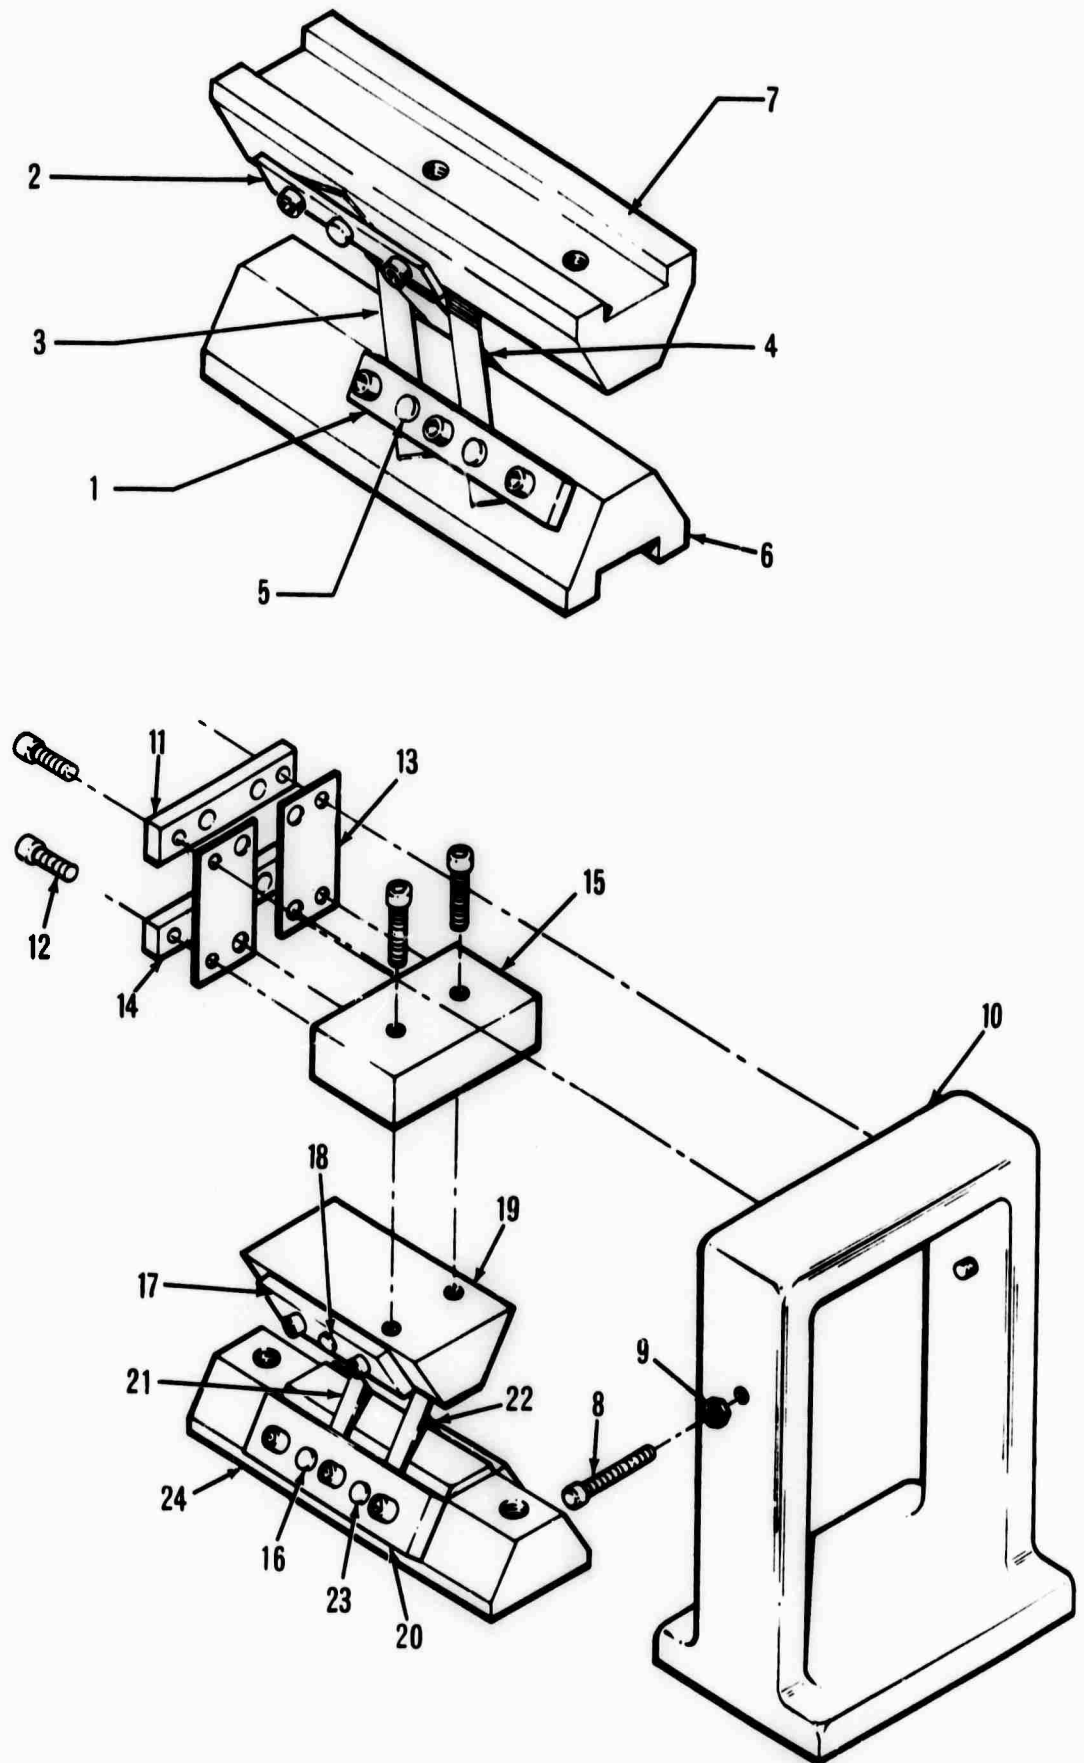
Upper and Lower Flexure Pivot Assemblies
